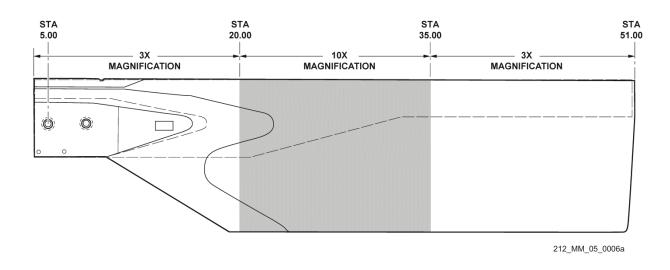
A. Tail Rotor Blade - Detailed Inspection
